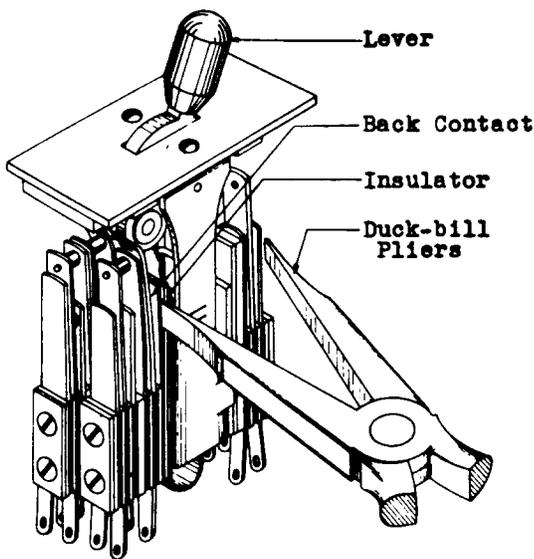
Method of Adjusting for Follow on Back Contact Springs
